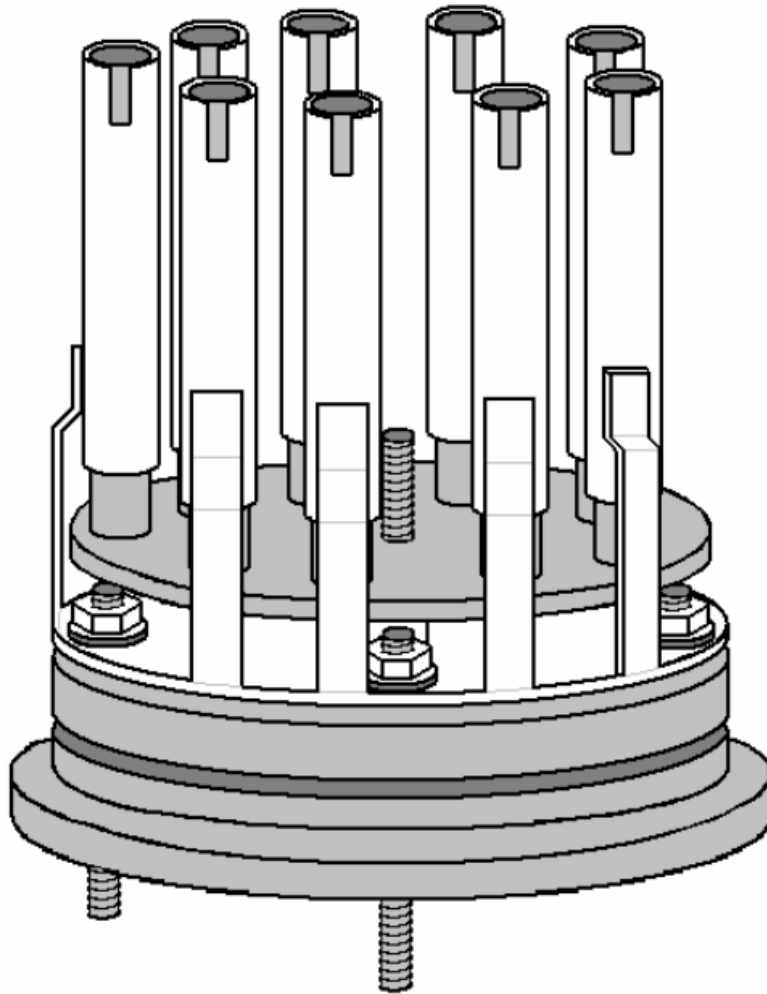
Putting together pipe support assembly, with steel plate mounting for outer tubes. The arms of the steel plate are given two bends in them, in order to kink them inwards to form mounts for the outer tubes.
